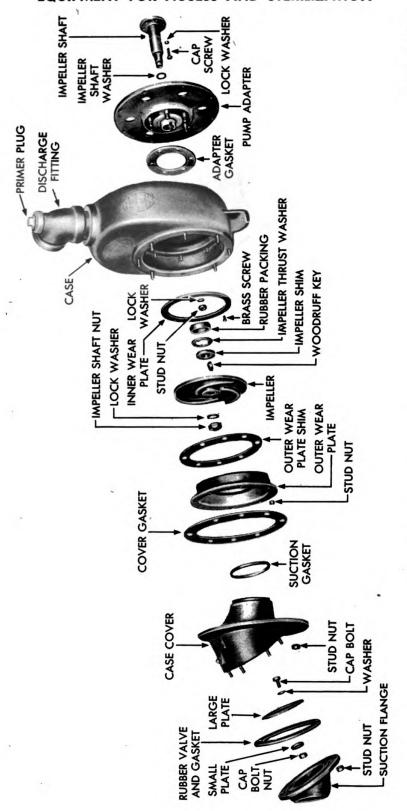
Engine-driven Centrifugal Pump — Exploded View
